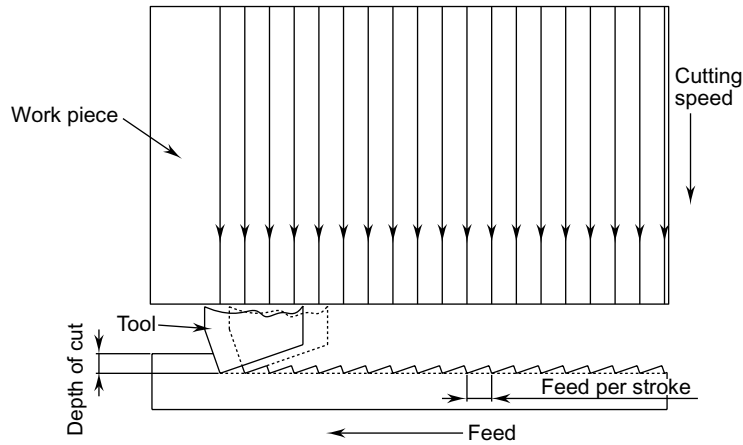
Typical arrangement of work piece and the tool in shaper
